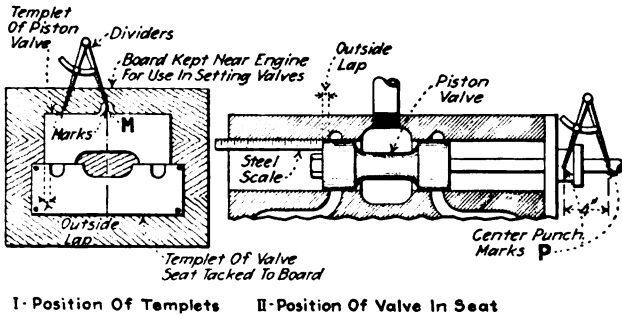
Method of establishing marks for setting a slide valve with templets.
